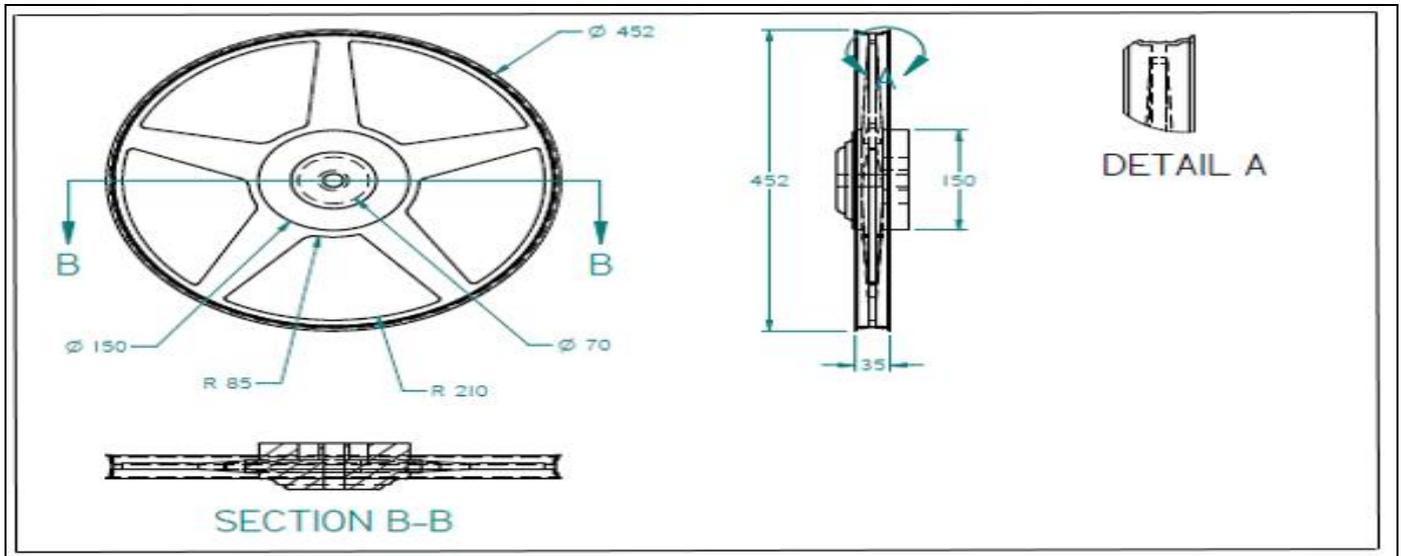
Motorcycle Wheel Views and Dimensions (mm)
